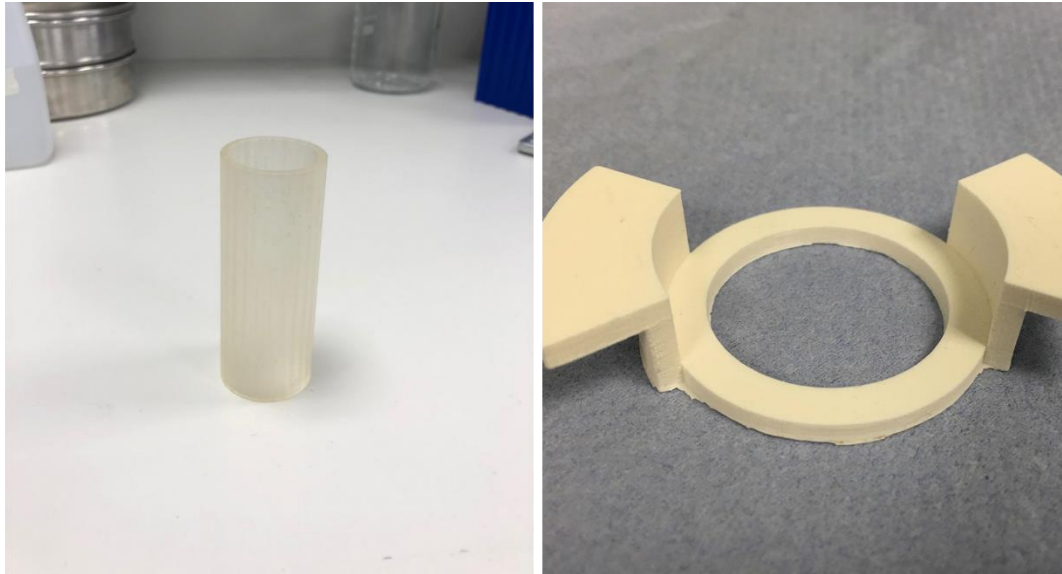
Final prototype of the 3D printed resin moulds and platform
